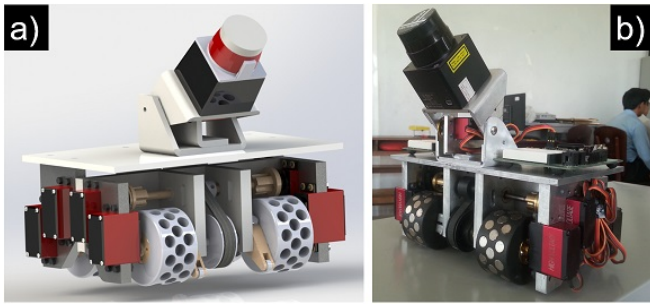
a) Robot's 3D design; b) Initial prototype of the robot.
